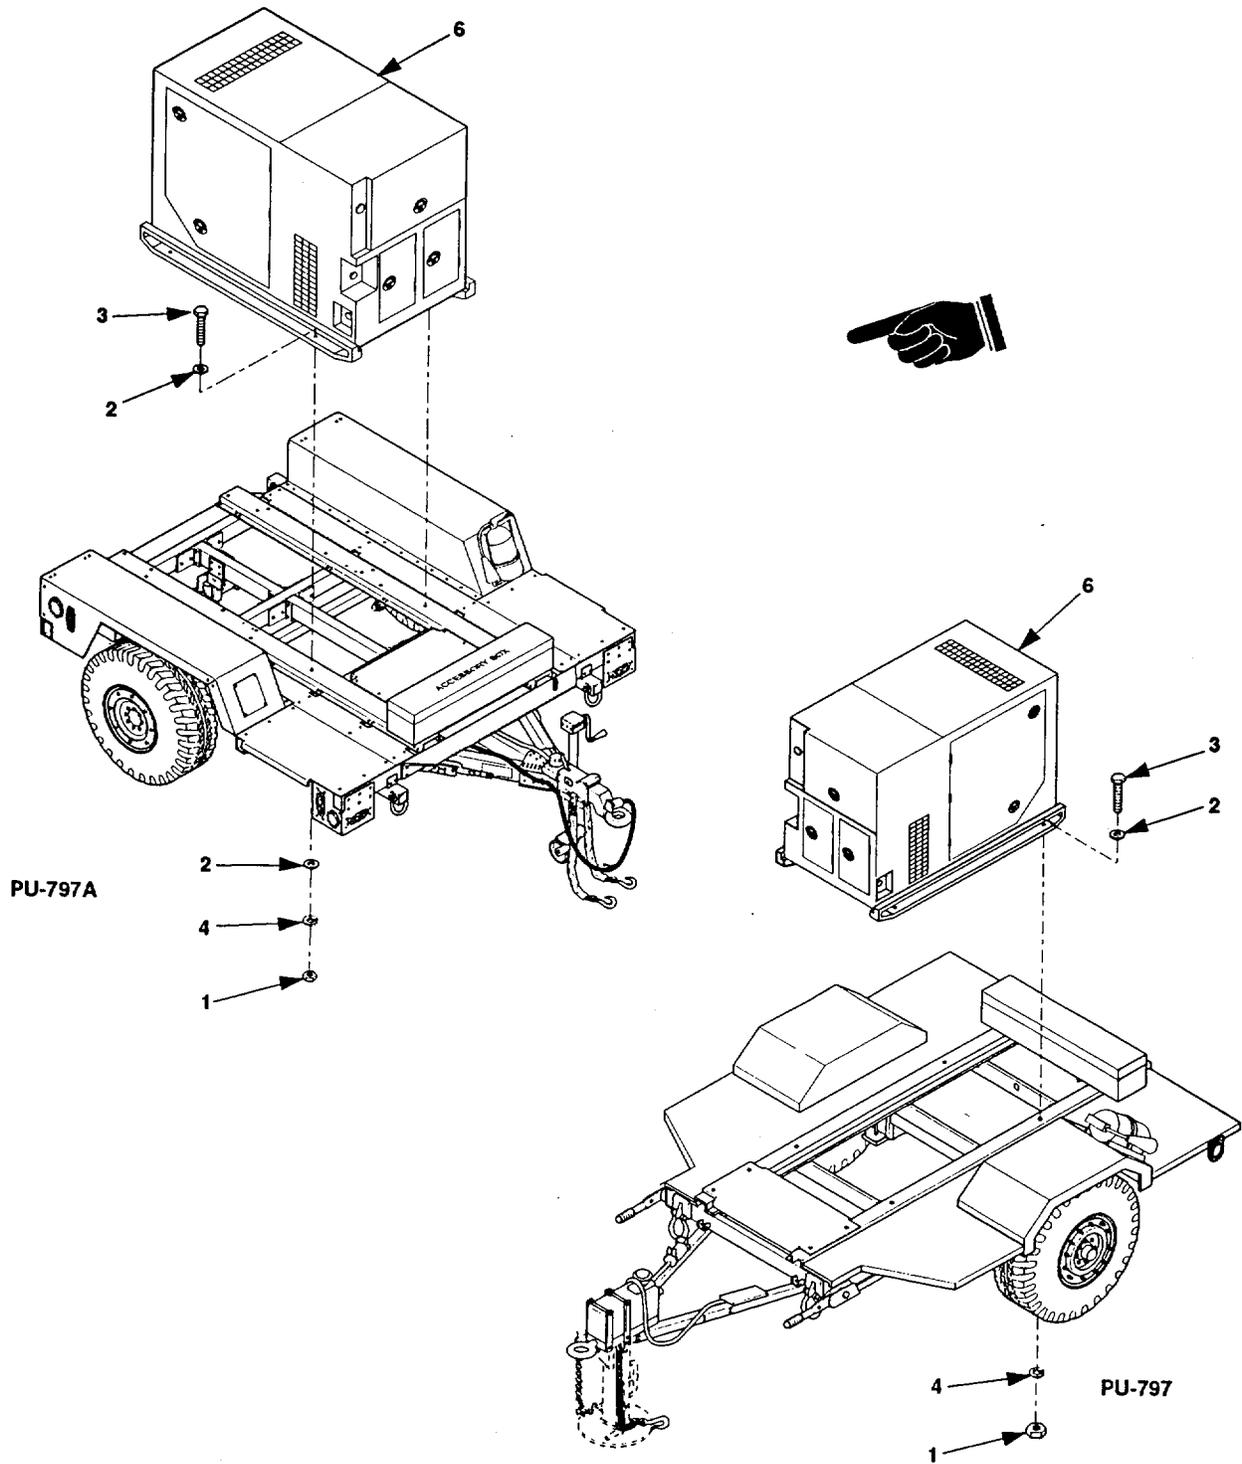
Removing Generator Set Mounting Hardware (Sheet 2 of 2).
